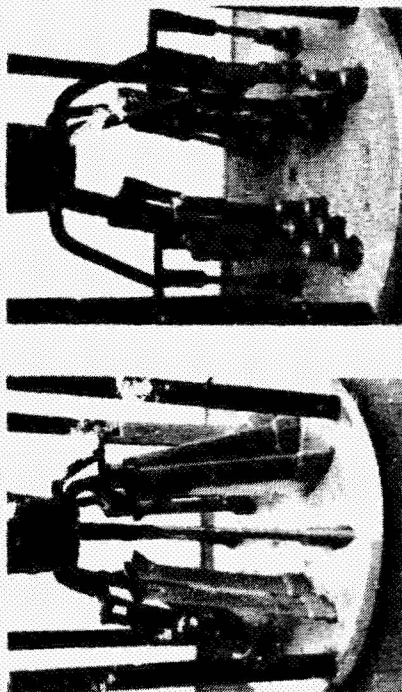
Wax assemblies for fabricating off-axis directionally solidified specimens.
